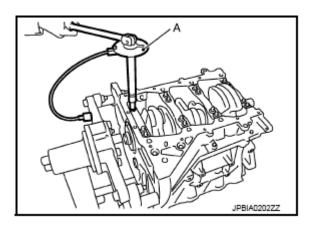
Checking Lower Cylinder Block Bolt Tightening Angle Courtesy of NISSAN NORTH AMERICA, INC.
